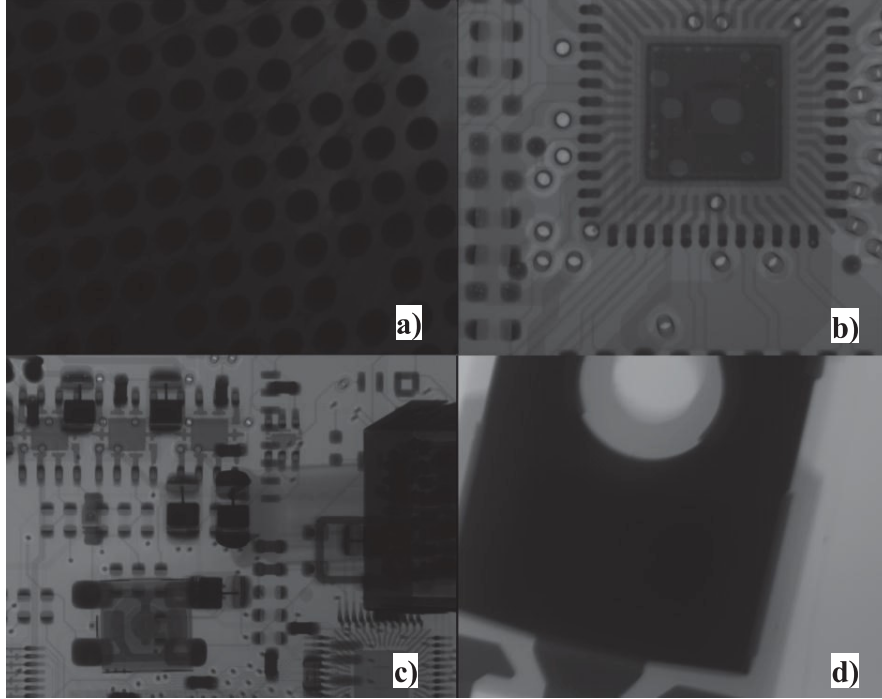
Examples of X-Ray images of printed circuit boards: a) angled view of BGA, b) chip with wire bonding, c) a fragment of a PCB, d) a transistor.
